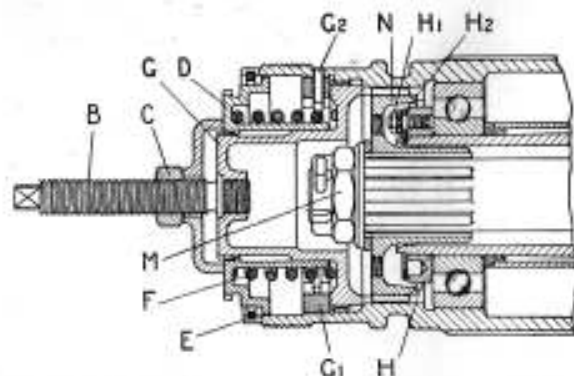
TOOL IN POSITION FOR REMOVING LOCKING RING.
